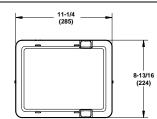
Dimensions of 599-10065 SKB\C Weather Shield in Inches (Millimeters).
